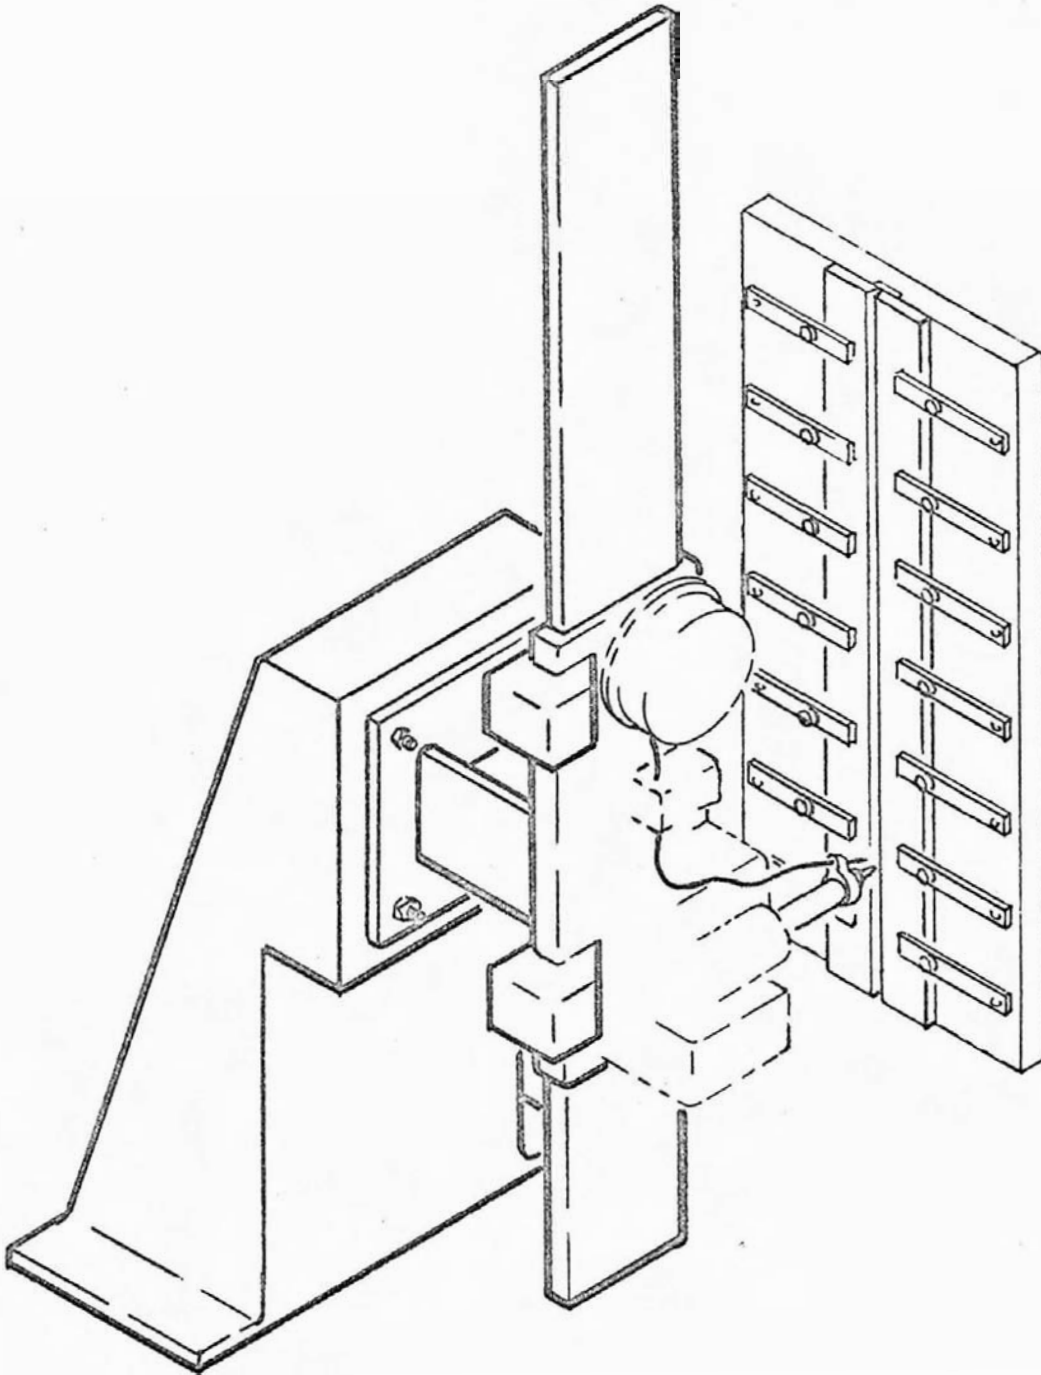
Welding Equipment Acceptance Test Weld
